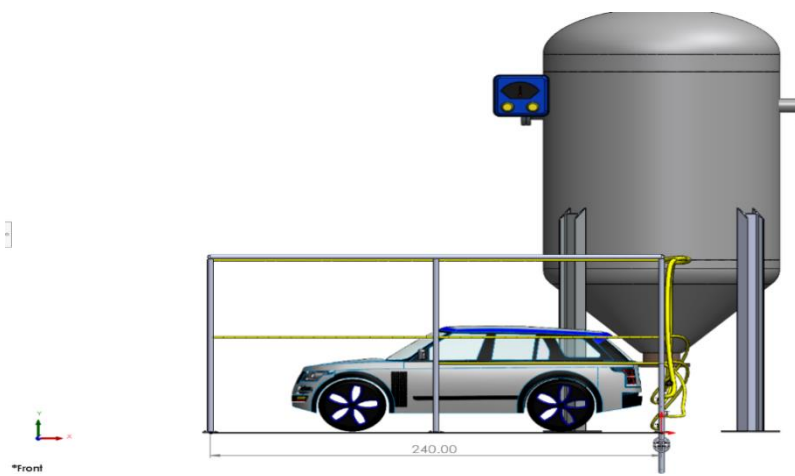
Lateral side view of the existing shower tester booth (L-240 inch or 20ft)
